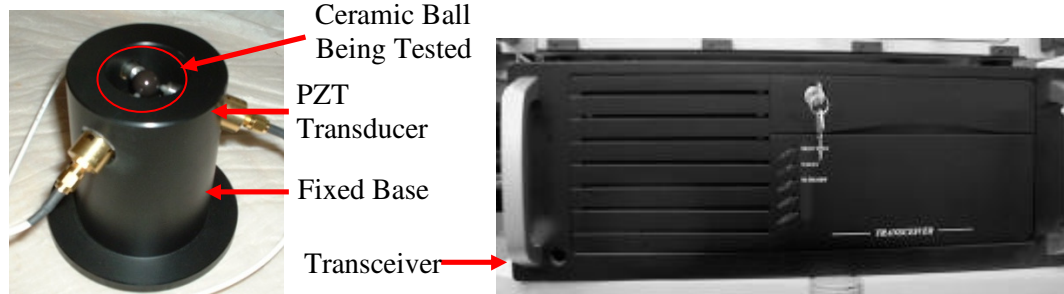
PCRT Test Fixture and PCRT Transceiver
